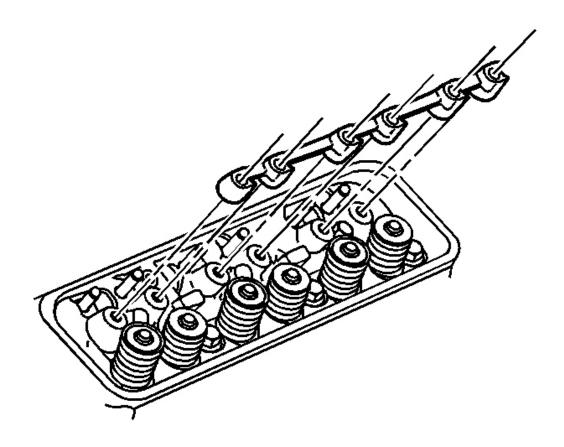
View Of Valve Rocker Arm Supports Courtesy of GENERAL MOTORS CORP.
